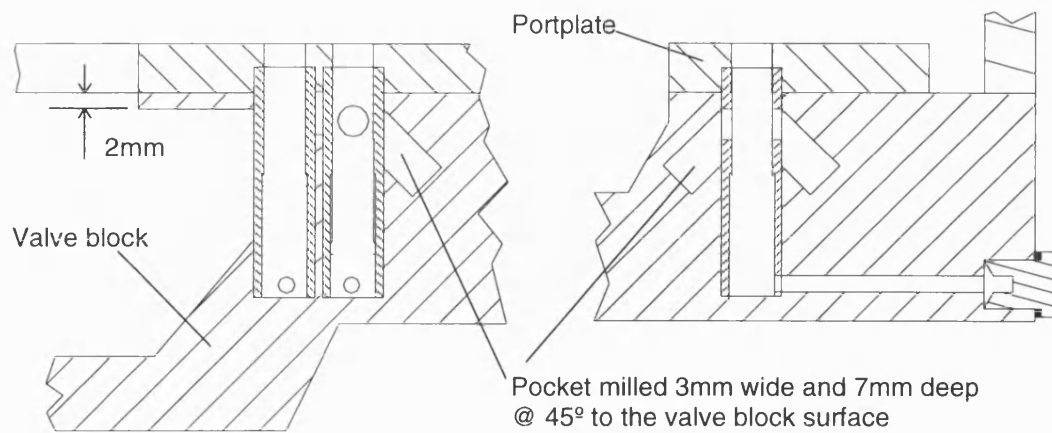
Scheme of valve block of the 1st HDCV working prototype (showing the position of the HDCV sleeves)
